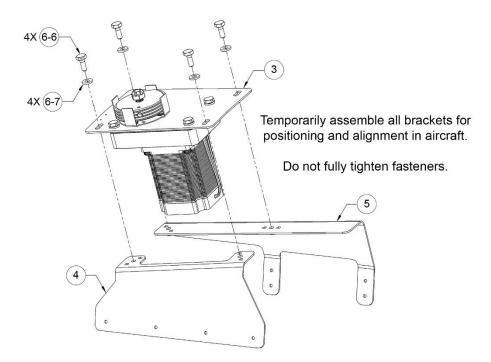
Attaching Plate Bracket with Roll Servo to Support Brackets
